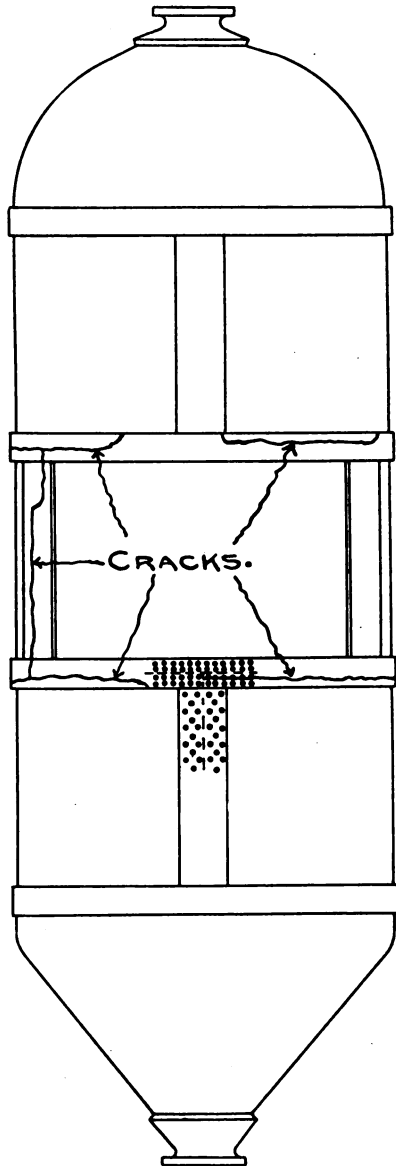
ELEVATION OF DIGESTER SHOWING LOCATION OF THE LINES OF FAILURE.
